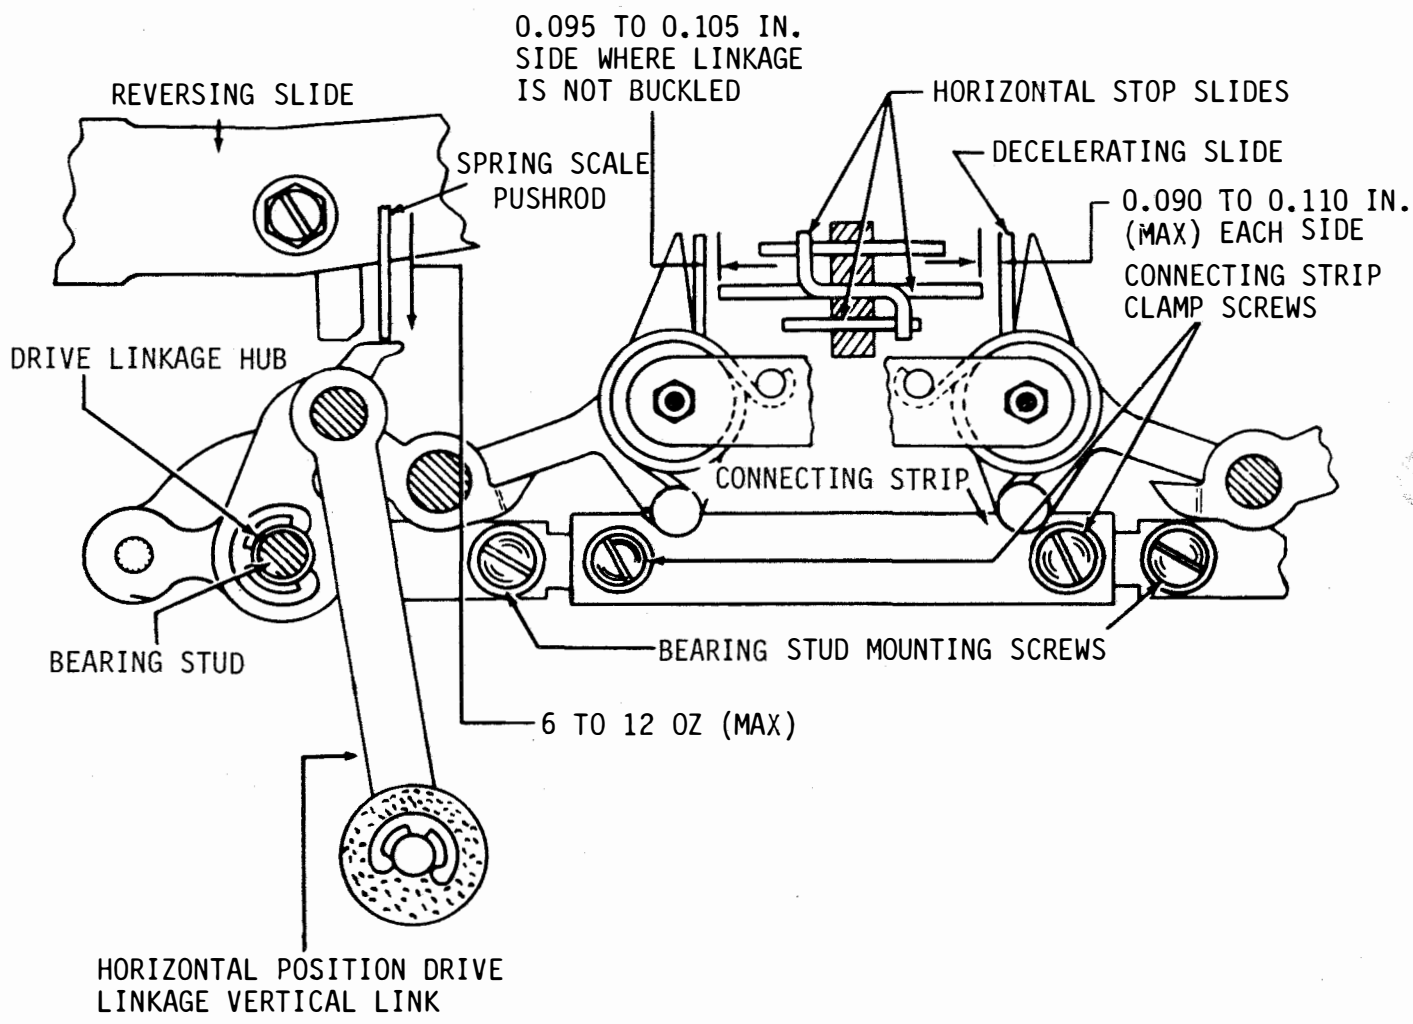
Horizontal Positioning Drive Linkage and Drive Linkage Spring, Front View
